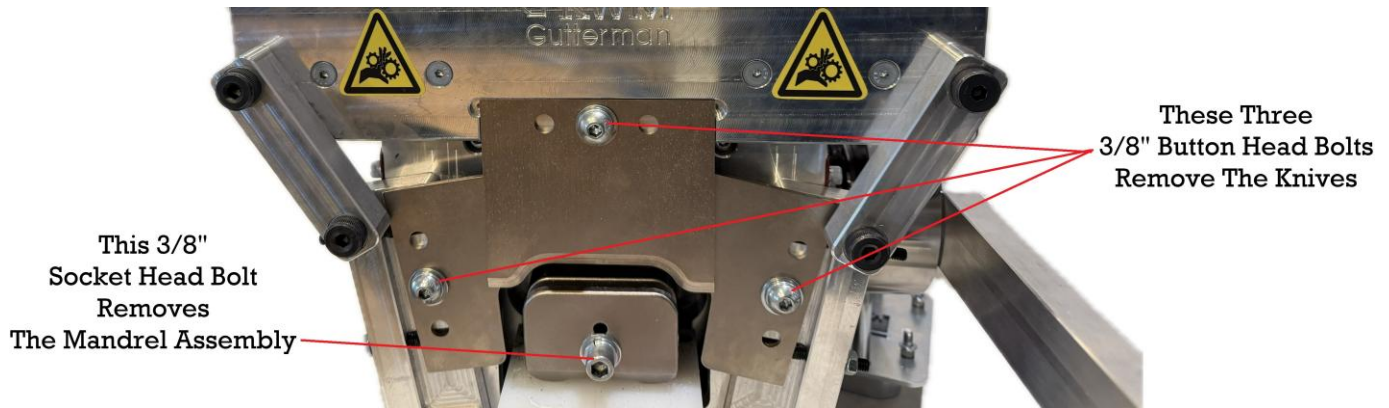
Front view of knives and mandrel assembly to be exchanged.
